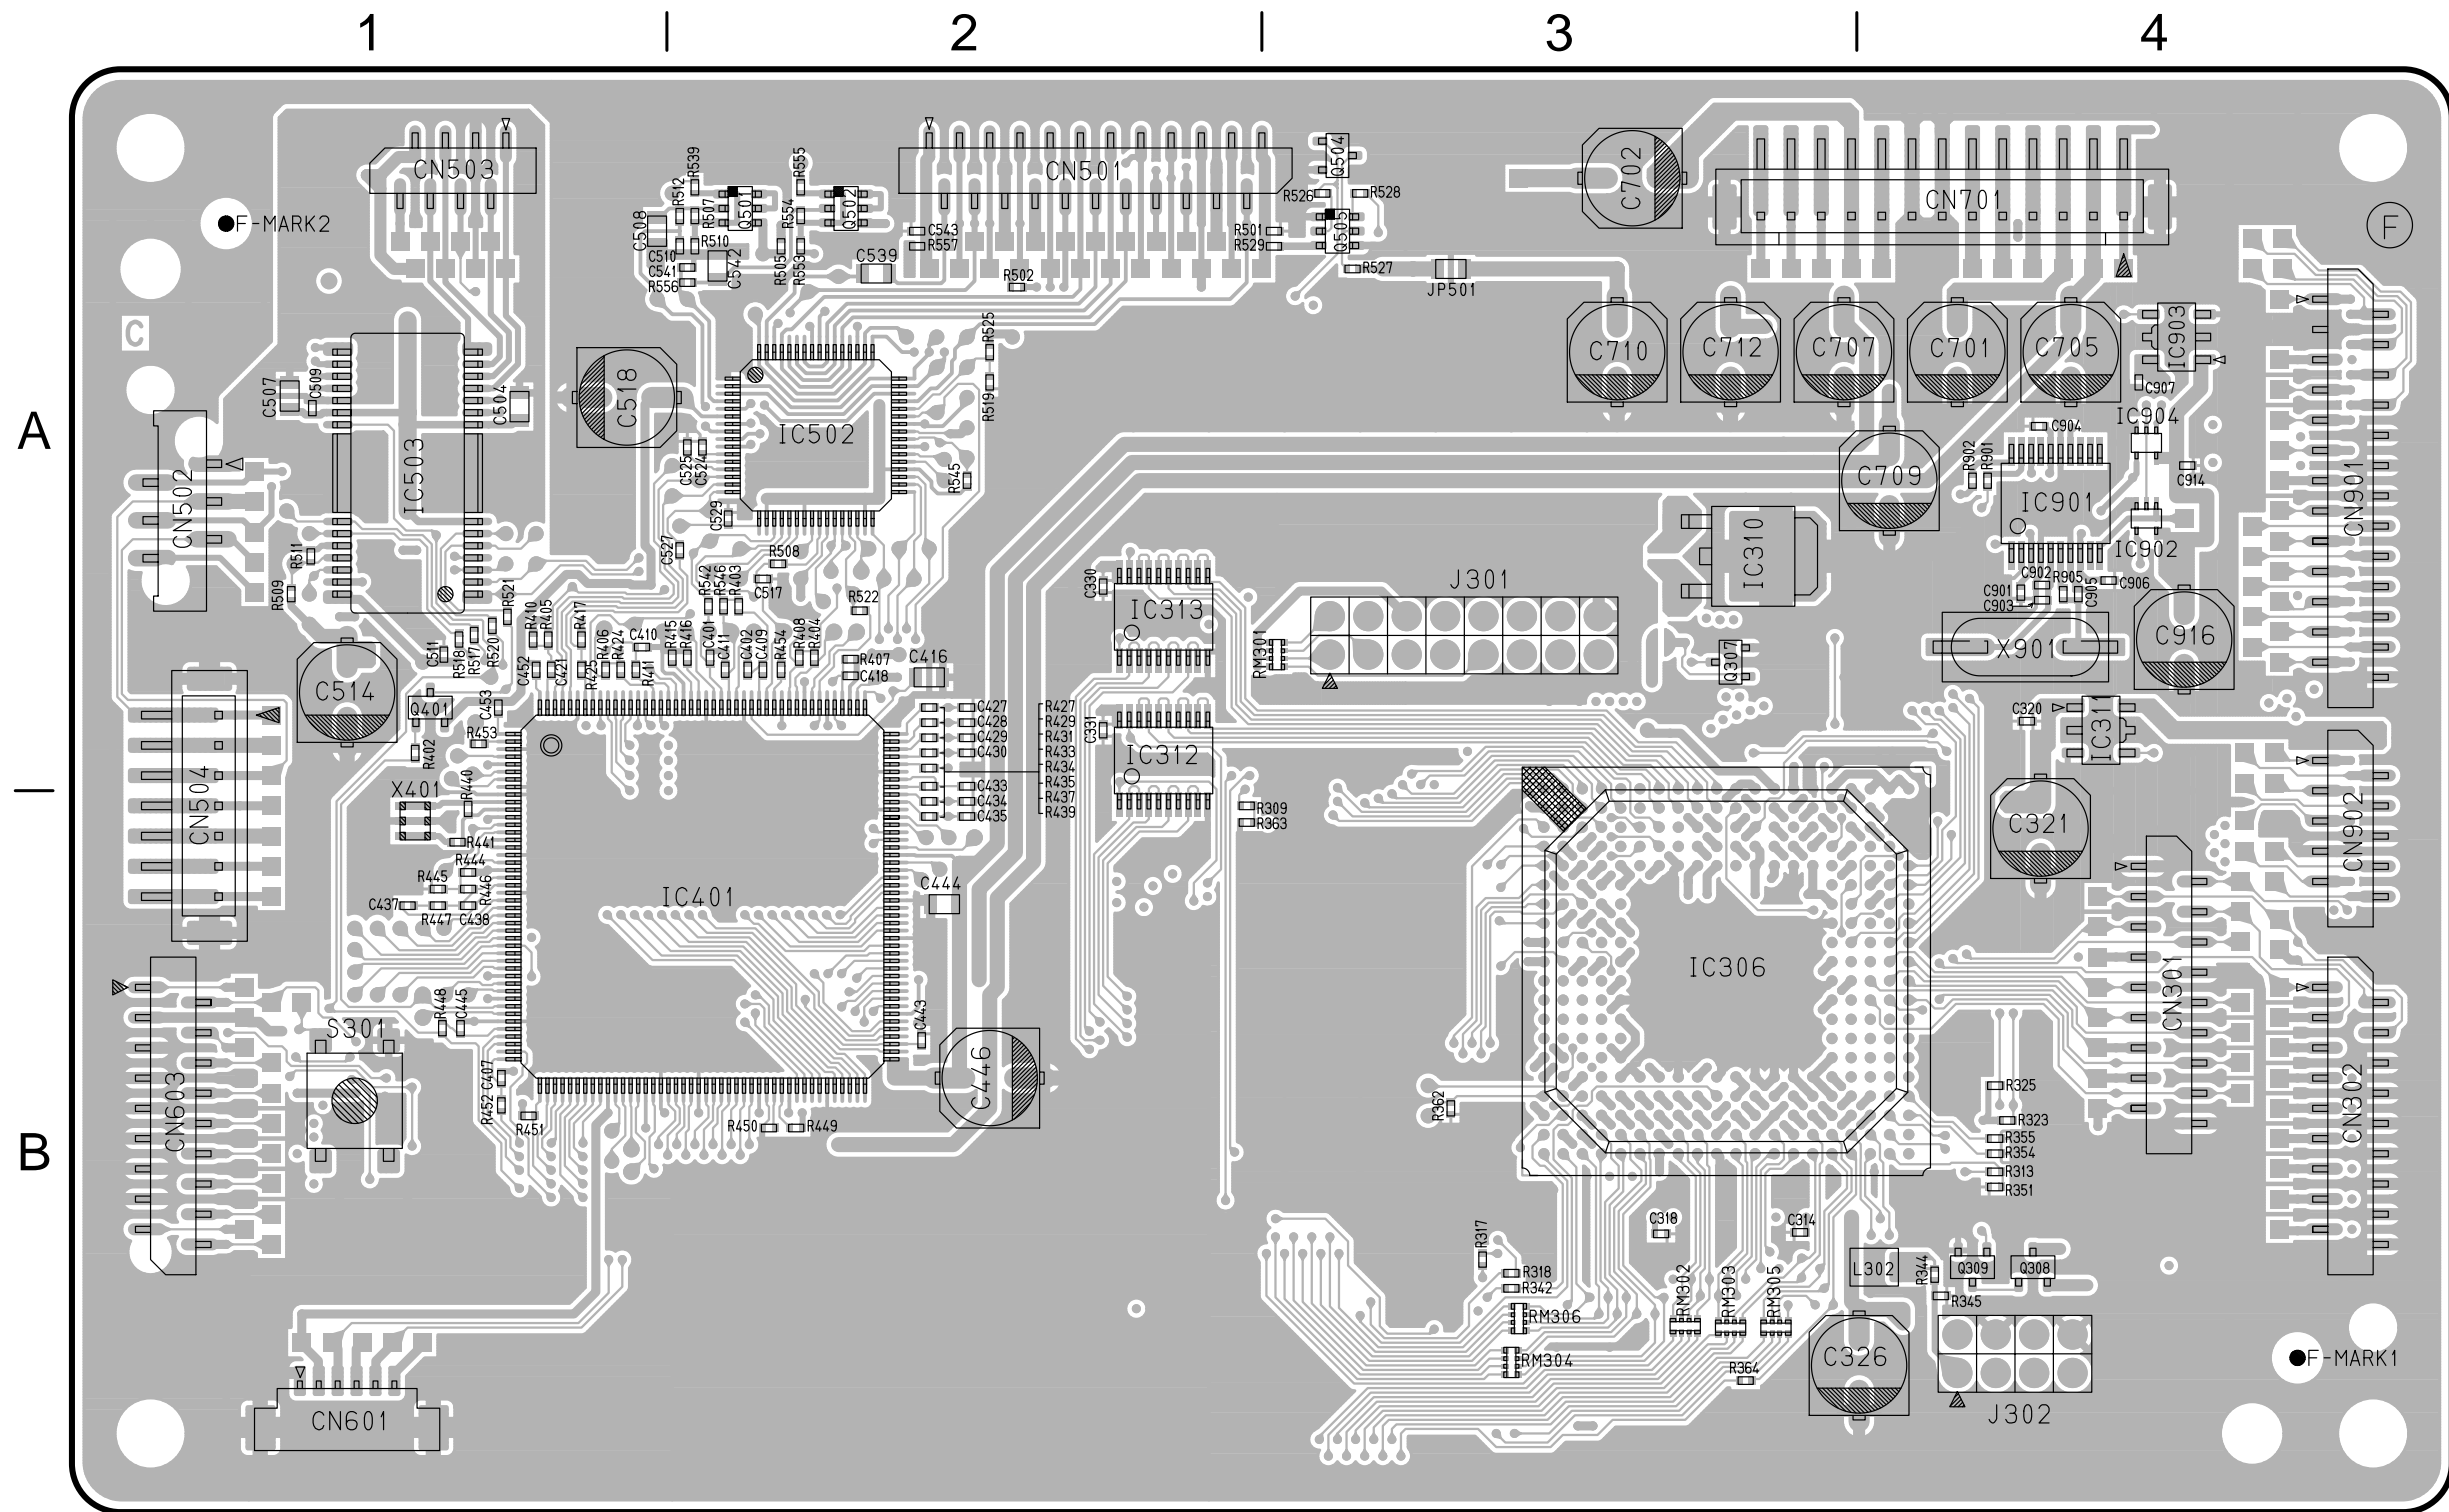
EU01 Main PC Board (Top pattern and Top parts location diagram)
